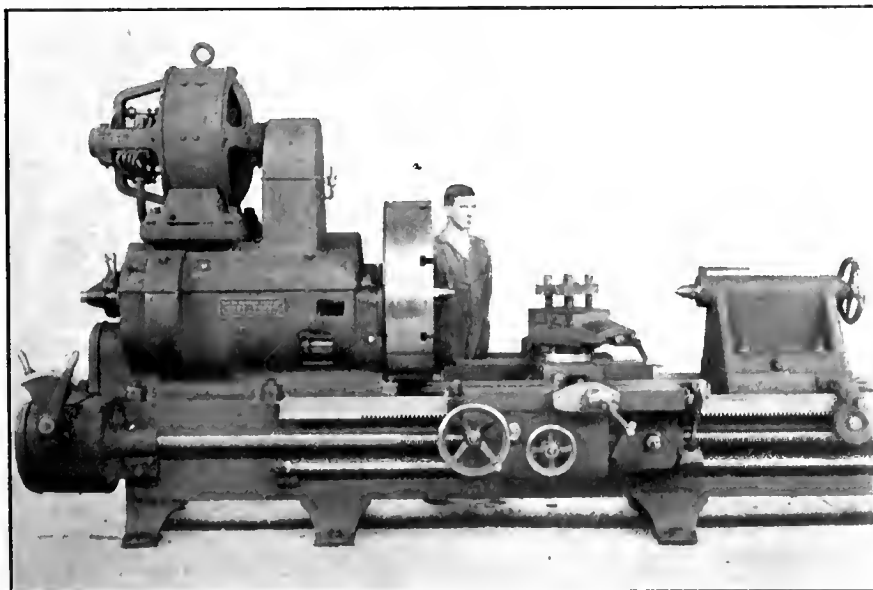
36-IN. MOTOR-DRIVEN LATHE FOR TURNING LARGE SHELLS
